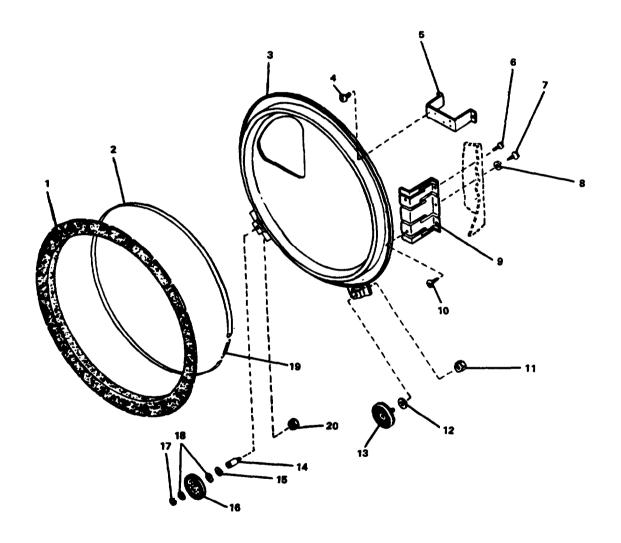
Dryer Rear Bulkhead and Cylinder Roller Group (Sheet 1 of 2).
